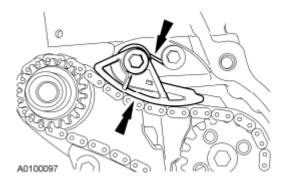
Installing Oil Pump Chain Tensioner Courtesy of FORD MOTOR CO.
